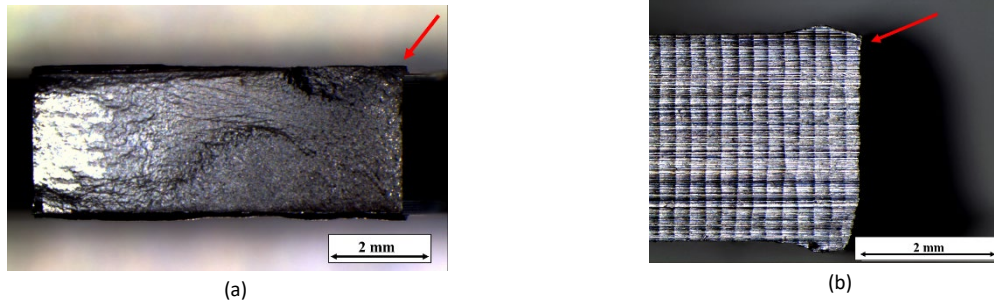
Fracture (a) surface and (b) profile of S460MC LasTIG sample (red arrow indicates fatigue crack initiation site)
